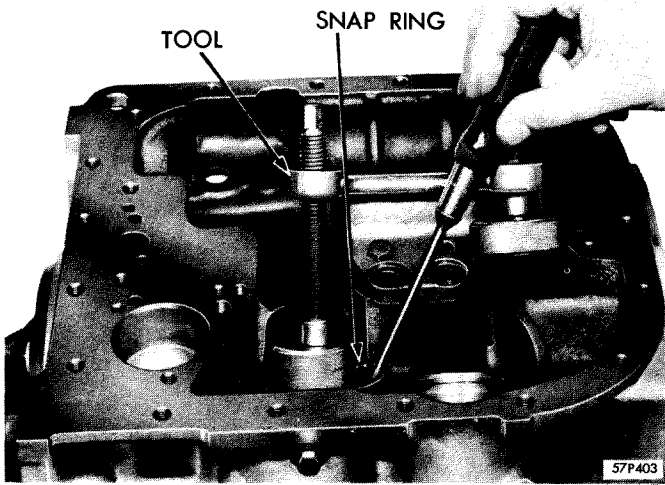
Removal and Installation of Kickdown Piston Rod Guide Snap Ring
